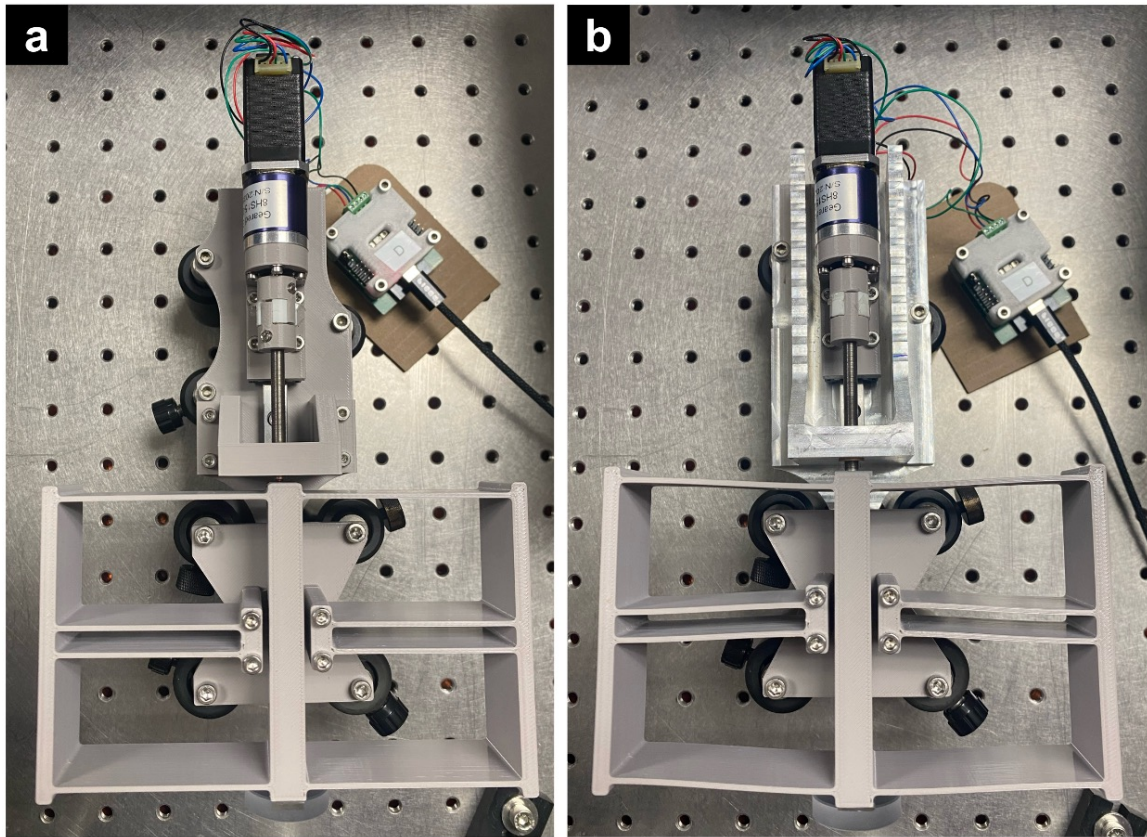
Machined bushing holder replacement for PETG design. (a) 3D-printed PETG precursor to the (b) aluminum bushing holder design, integrated into the mechanical system.
